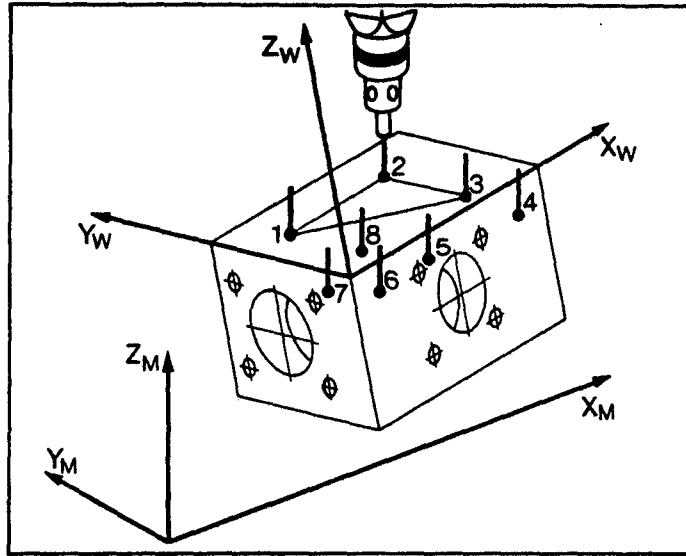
Zeiss Machine and Workpiece Coordinate Systems
